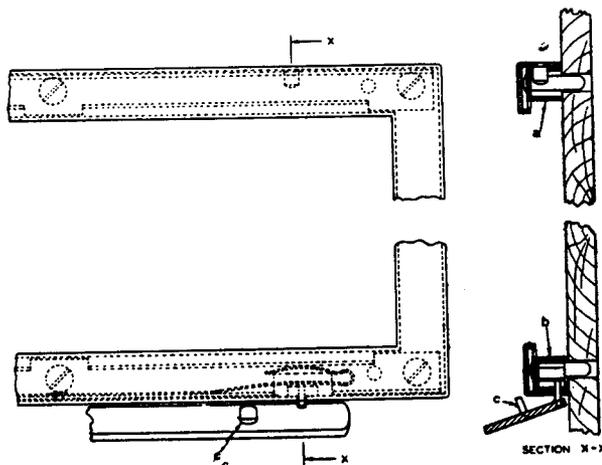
CONSTRUCTION OF NOTICE FRAME.
